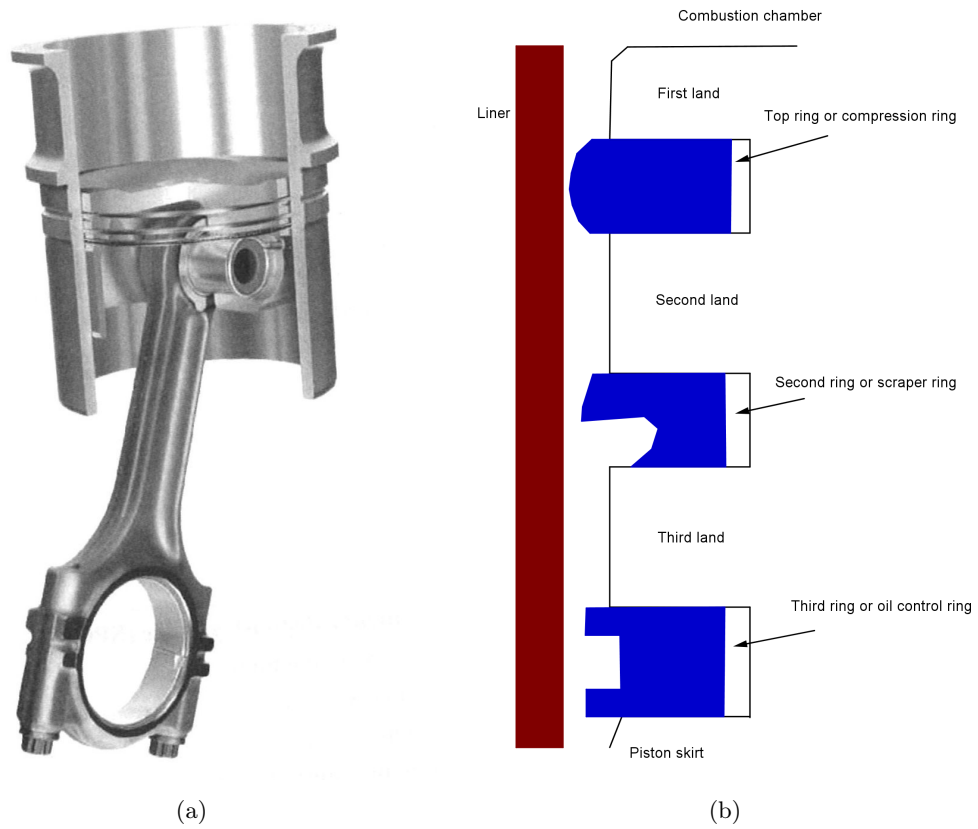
Piston Pack (a) global view (b) piston rings - liner
